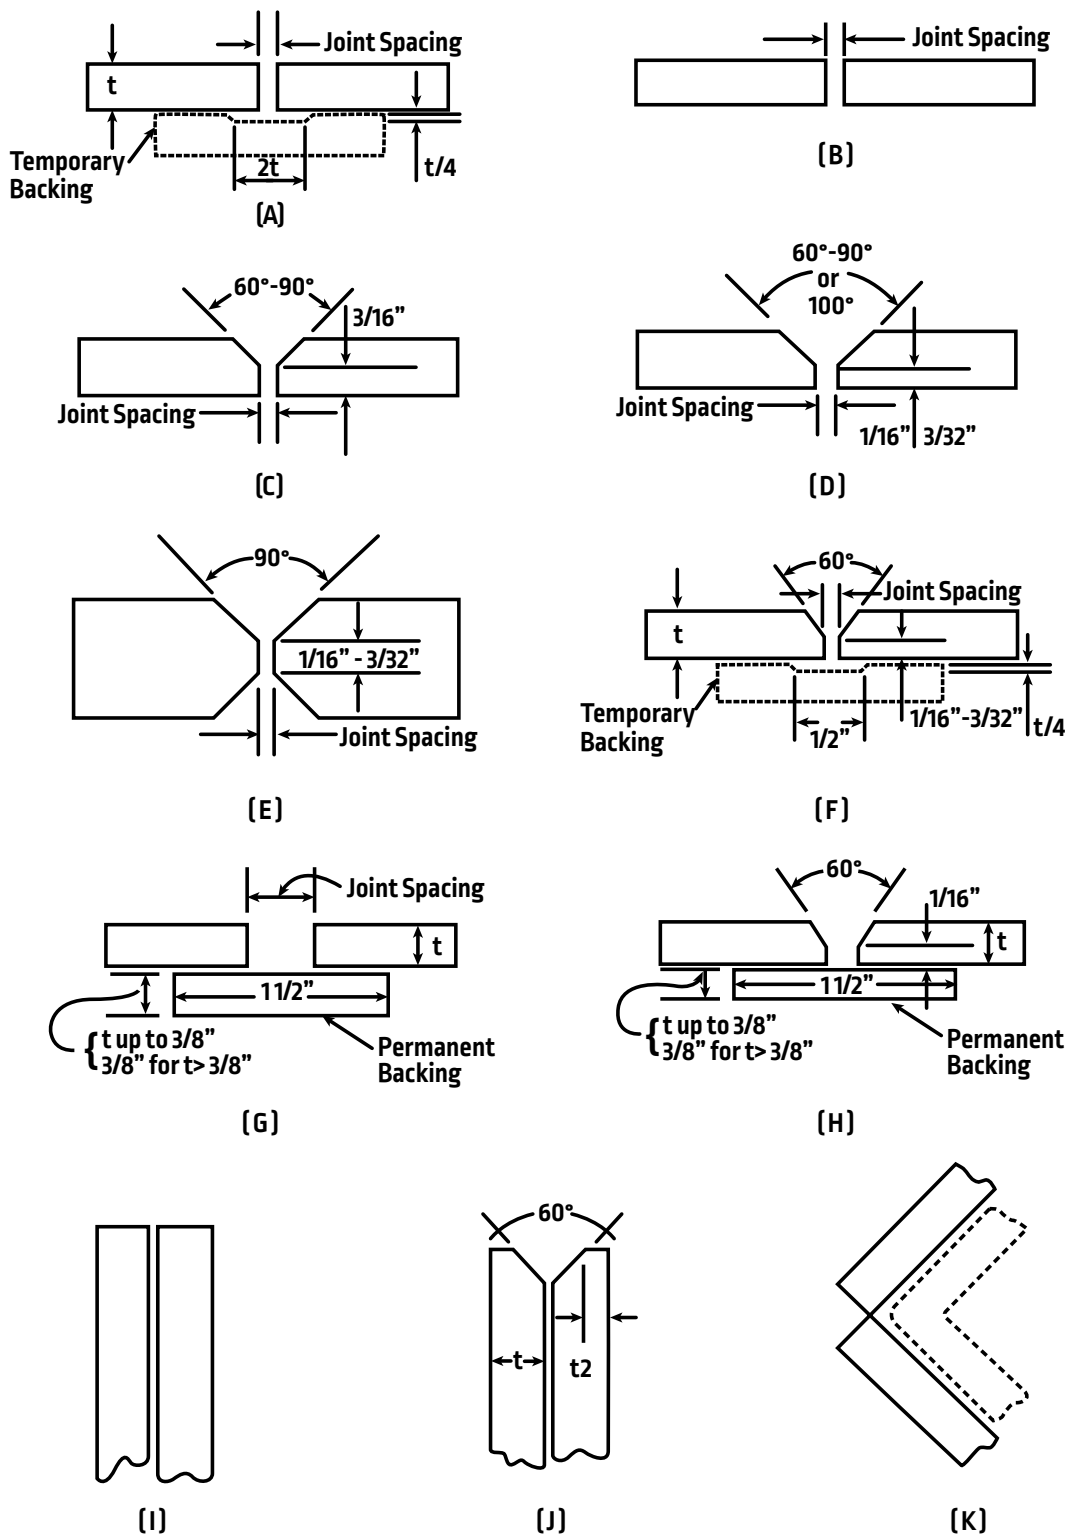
Welding Joint Designs for Aluminum GMAW Groove Welding — Flat, Horizontal, Vertical and Overhead
